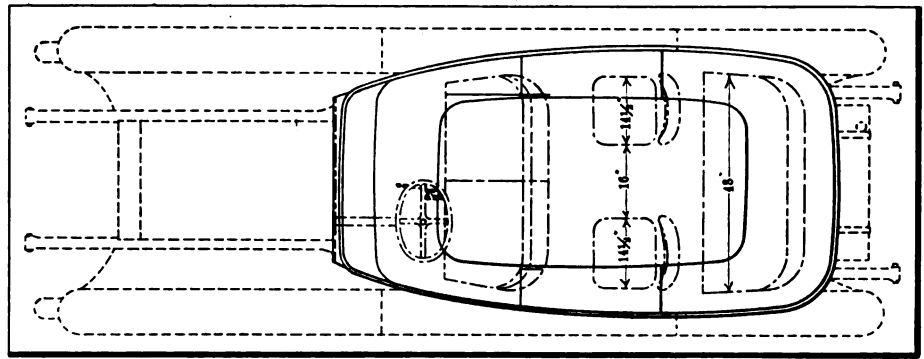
Plan view showing the roomy arrangement of seats and location of steering wheel
